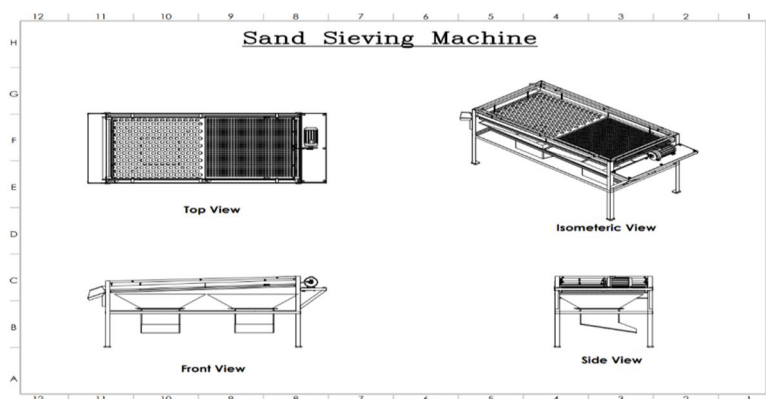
Drawing of Multi-Sieve Sand Sieving Machine
